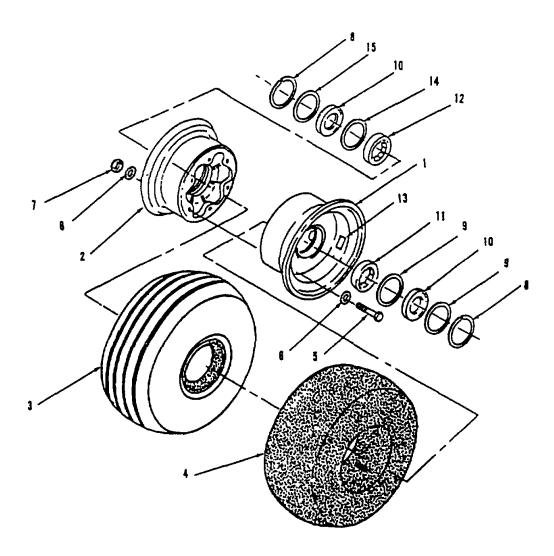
Wheel Assembly, Model 204-050-200-5
